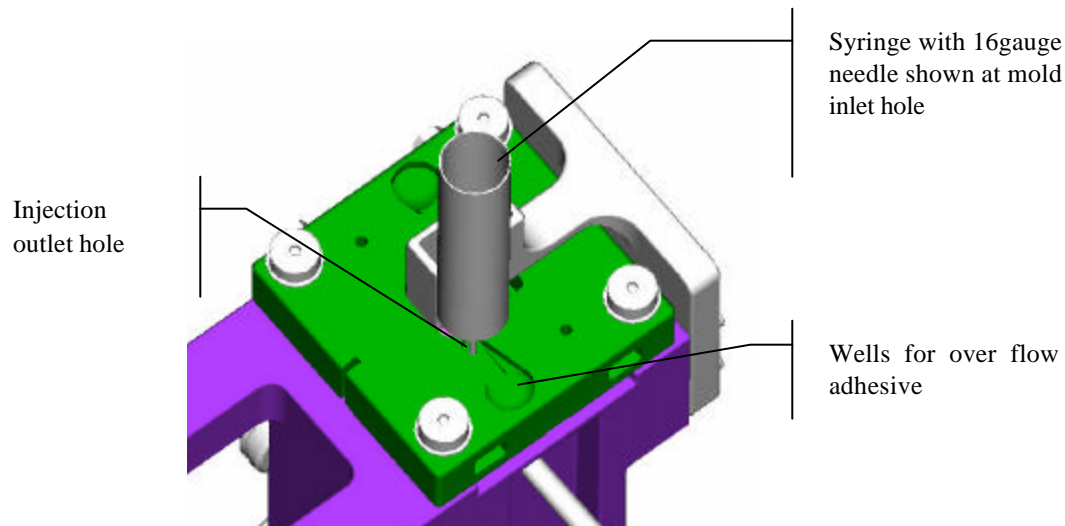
PN-B7562 Bond Set-up Assembly on Worktable, Injection View Shown
